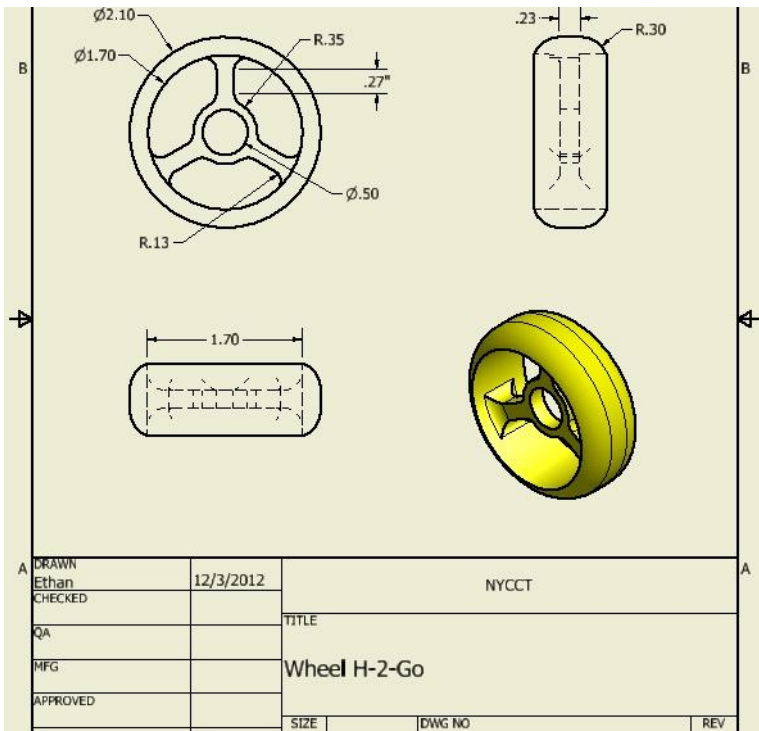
Wheel and rim printed as one part. Ball bearing to be added to reduce friction.
